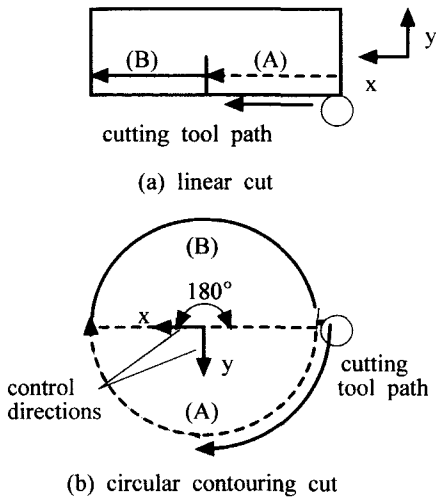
Testing configuration along two sections : (A) static runout cut and (B) static runout cut with PI control.
